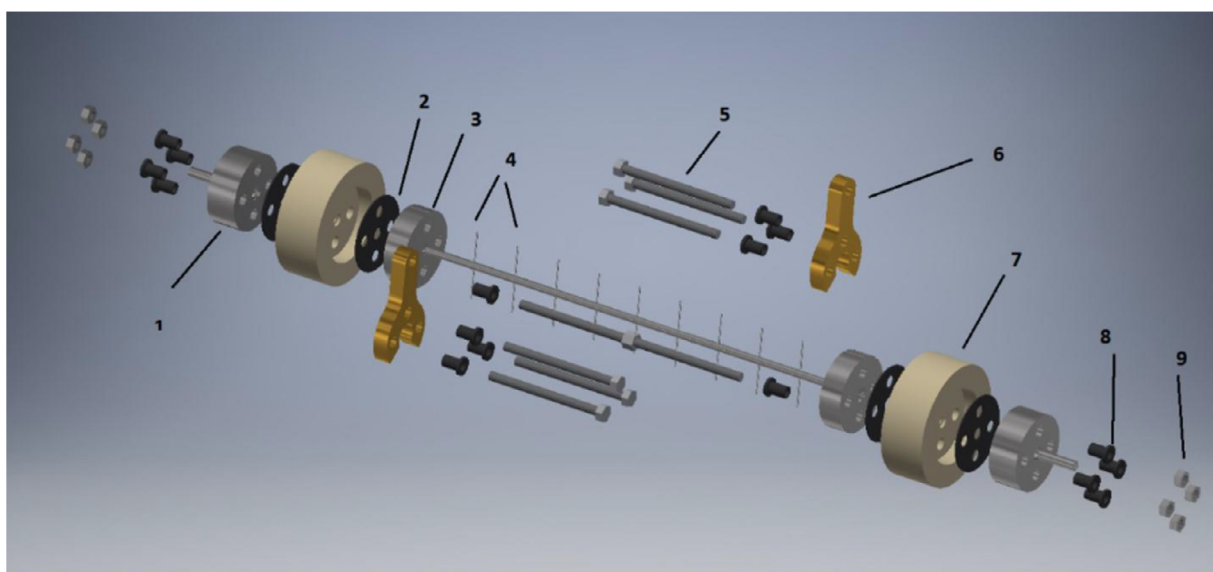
3D model of heat transfer test Section. 1 - fastening flange, 2 - Teflon seal, 3 - stainless-steel test section, 4- soldered thermocouples, 5 - screws, 6 - DC current connectors, 7 - PEEK electrical insulators, 8 - Teflon screw electrical insulators, 9 - nuts.
